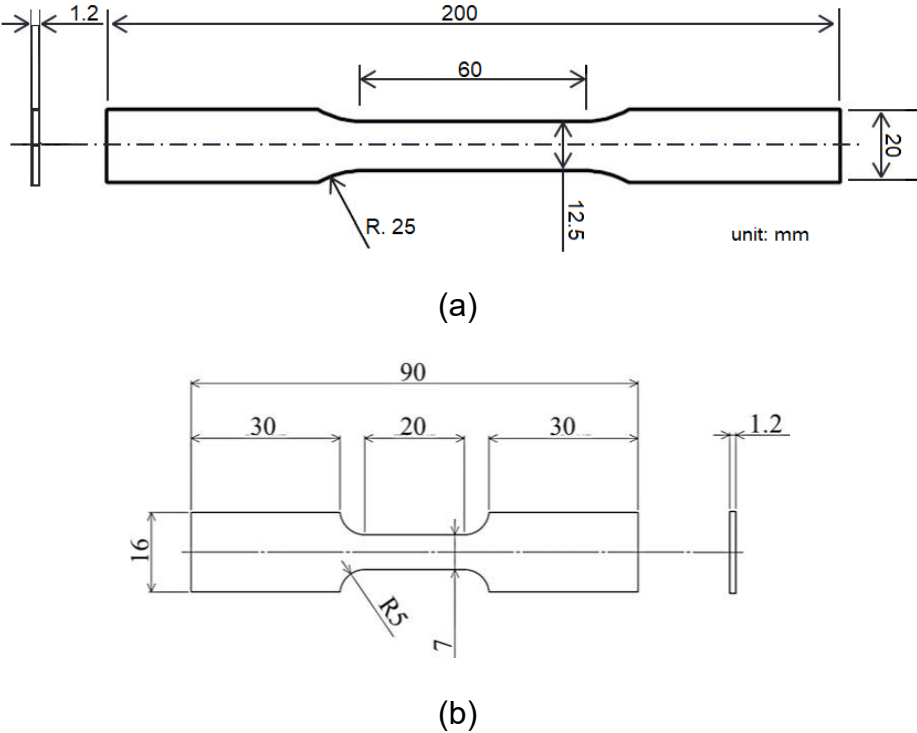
dimensions of (a) quasi-static and (b) impact tensile specimen
